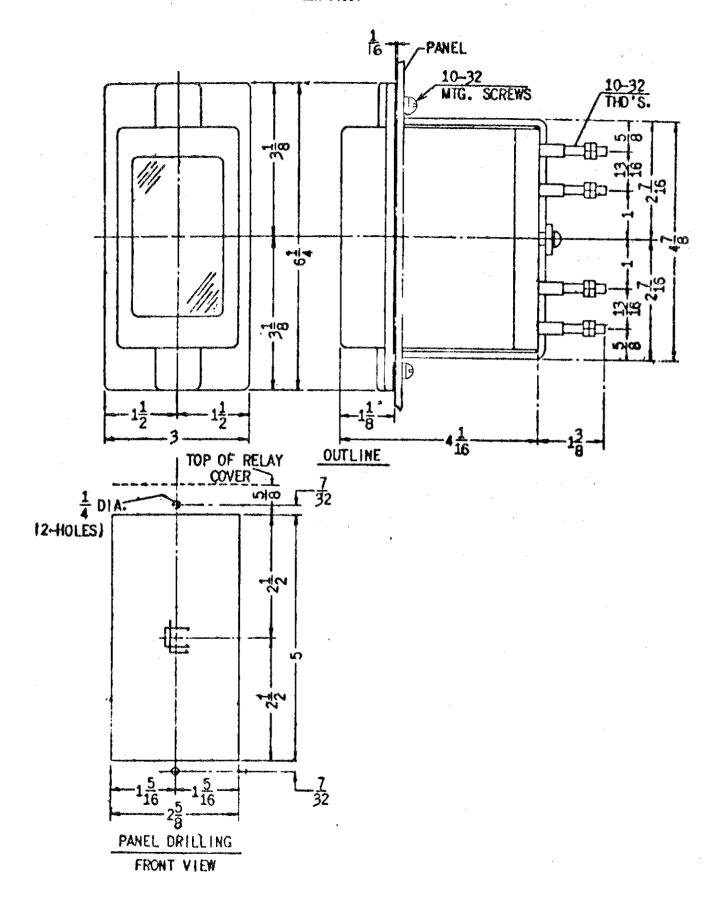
(0148A3978-6) Outline And Panel Drilling Dimensions For The Semi-Flush Mounted NGA15AB Relay
